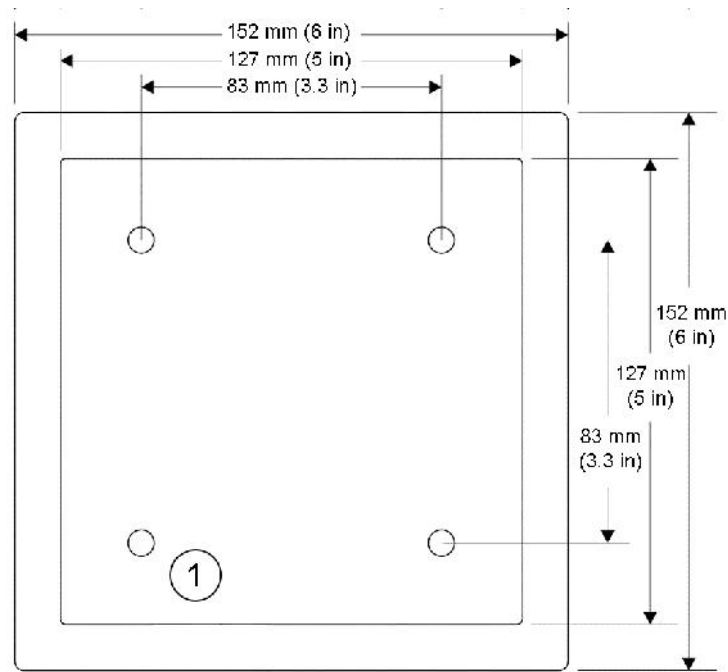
RDP-110C Mounting Dimensions (Rear Panel)
